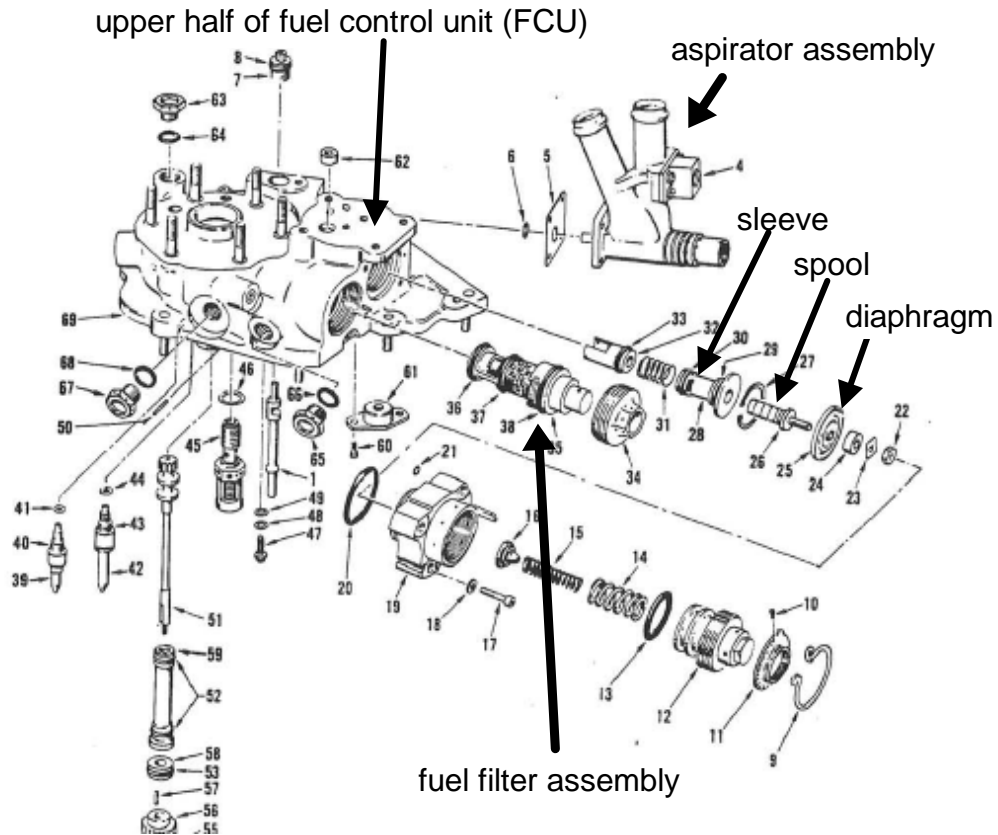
Diagram of a portion of the fuel control unit showing the aspirator assembly and fuel filter assembly.
